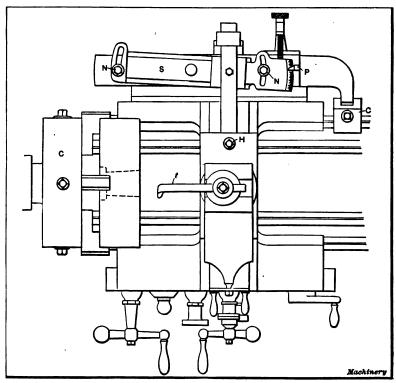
Liathe with Taper Attachment arranged for Boring Taper Hole
